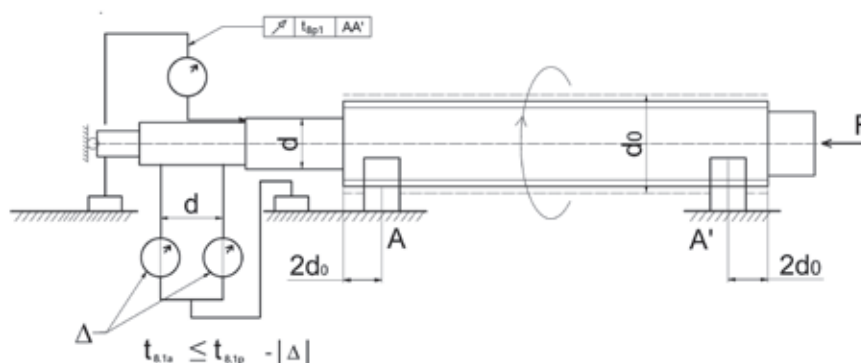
Measurement of the axial run-out $t_{8,1}$ of the bearing surfaces
